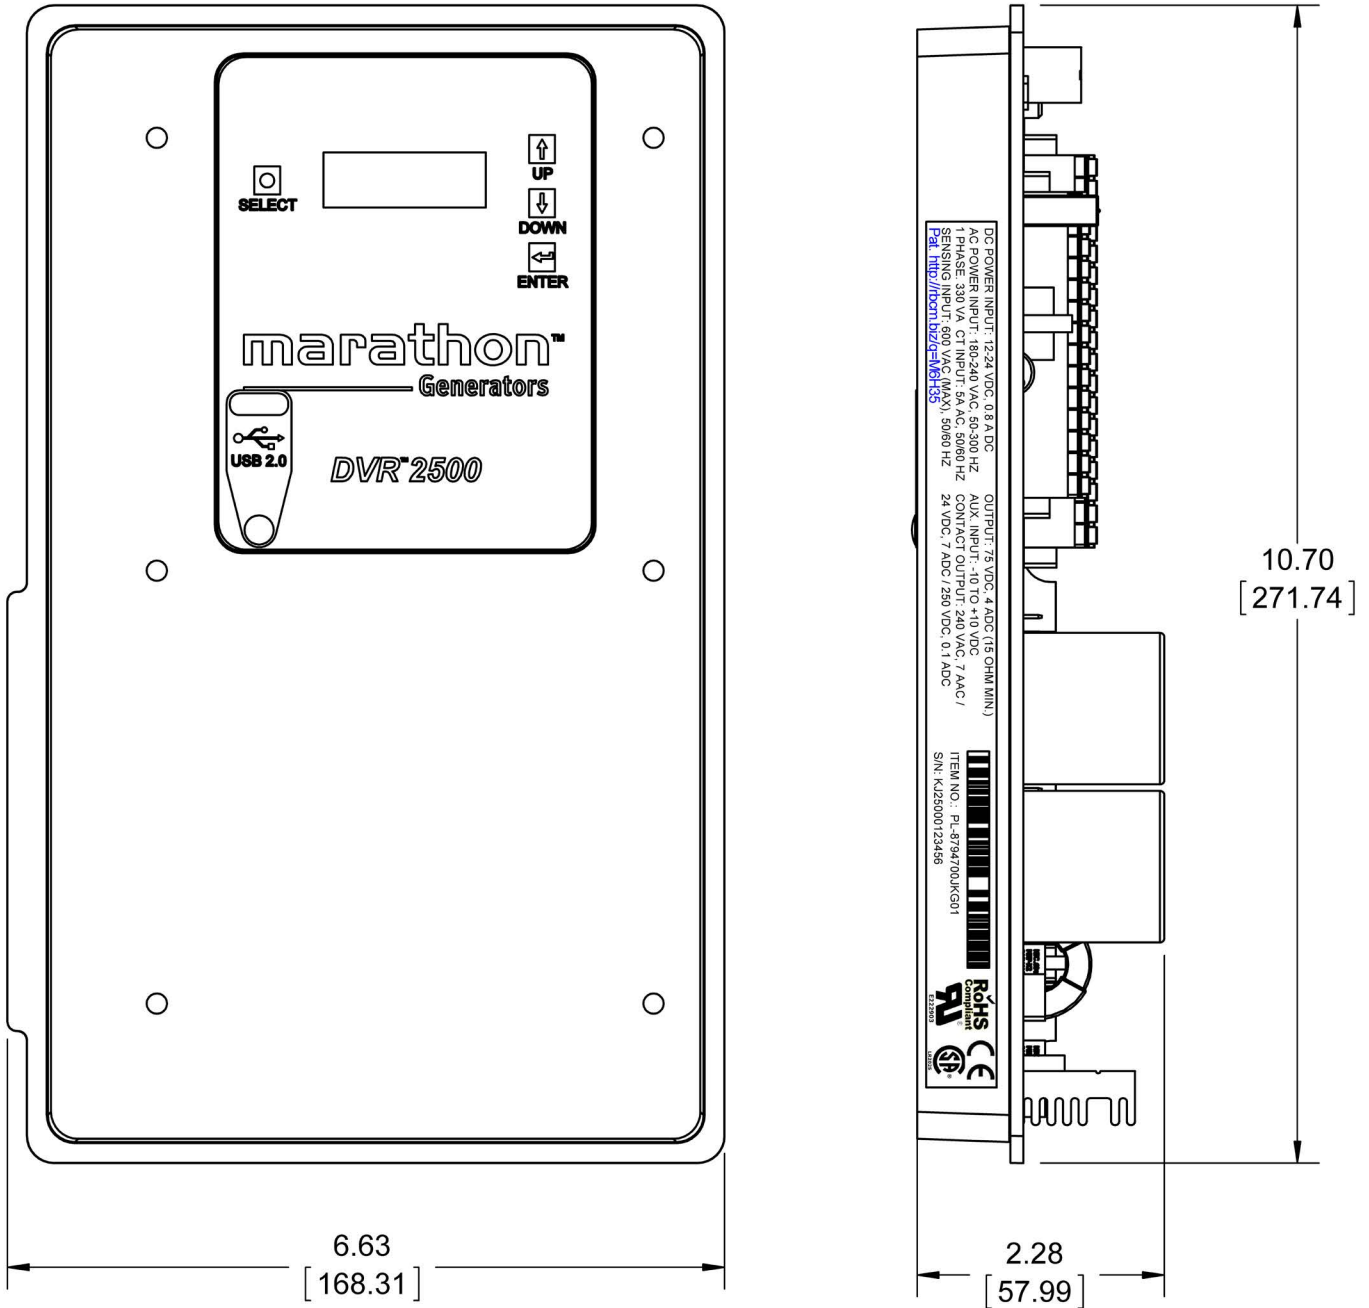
The 2500 front dimensions without cover. Valid for 2400 & 2500 versions.
